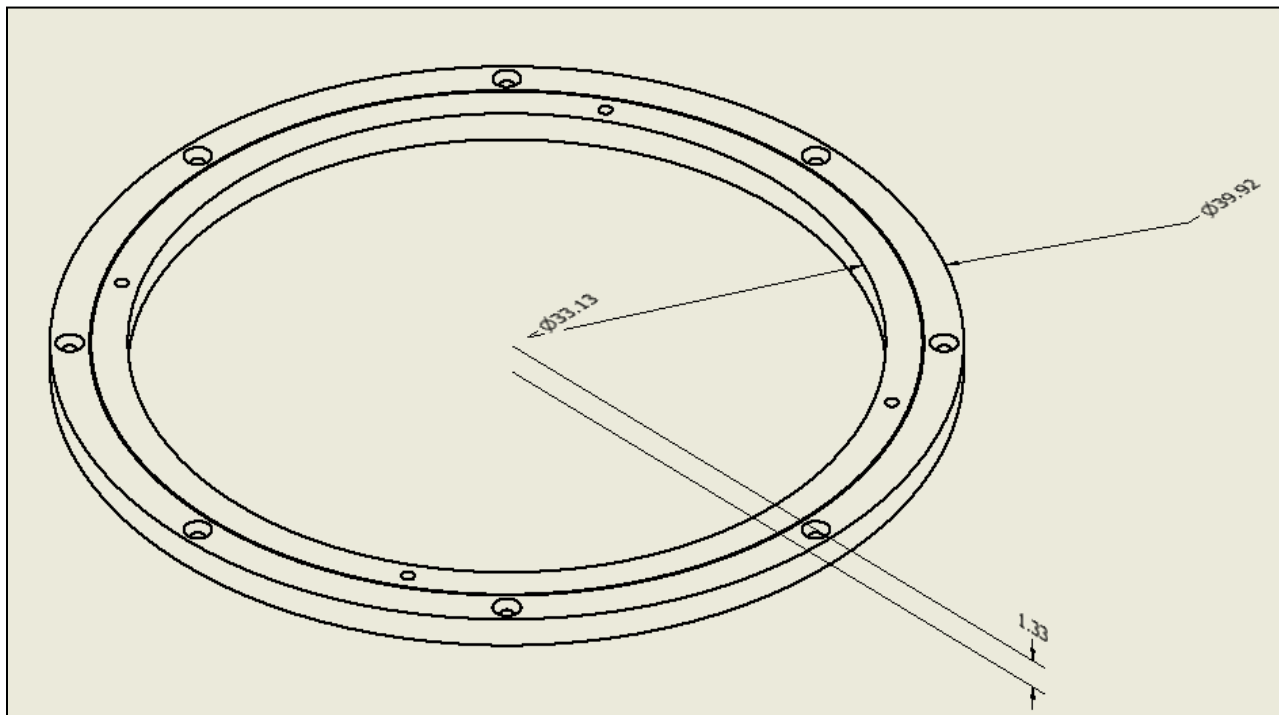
Rough dimensions of the 40-in “Lazy Susan” turntable bearings
